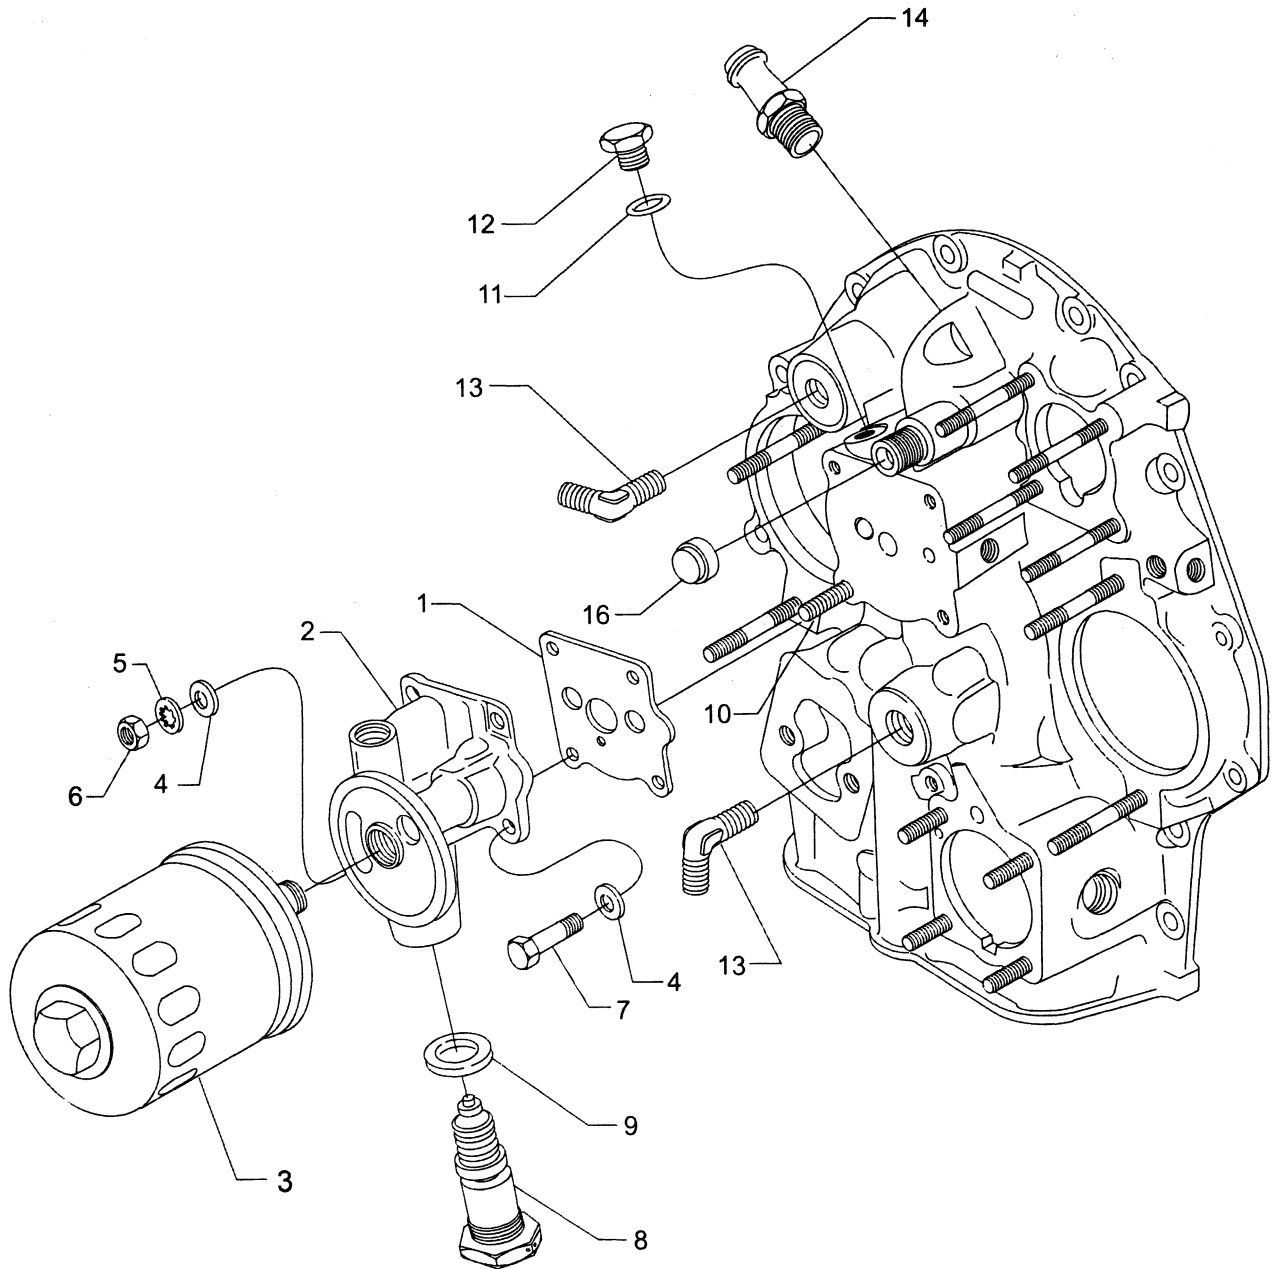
OIL FILTER ASSEMBLY, OIL COOLER BYPASS VALVE AND BREATHER FITTINGS
